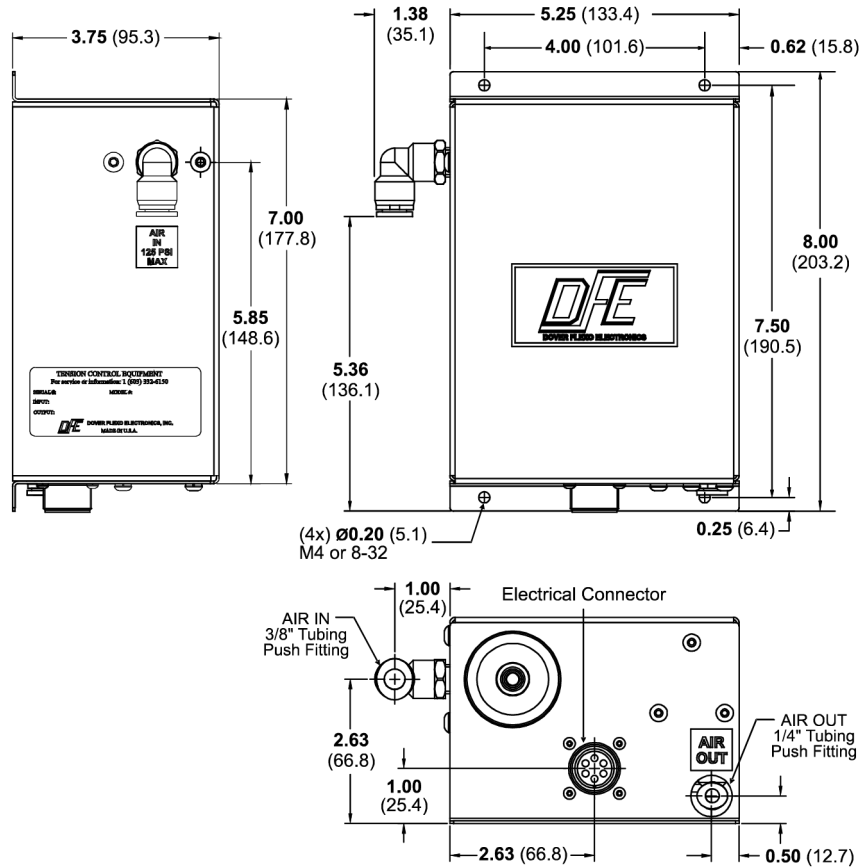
PNEUMATICS ENCLOSURE DIMENSIONS FOR VERSION P
